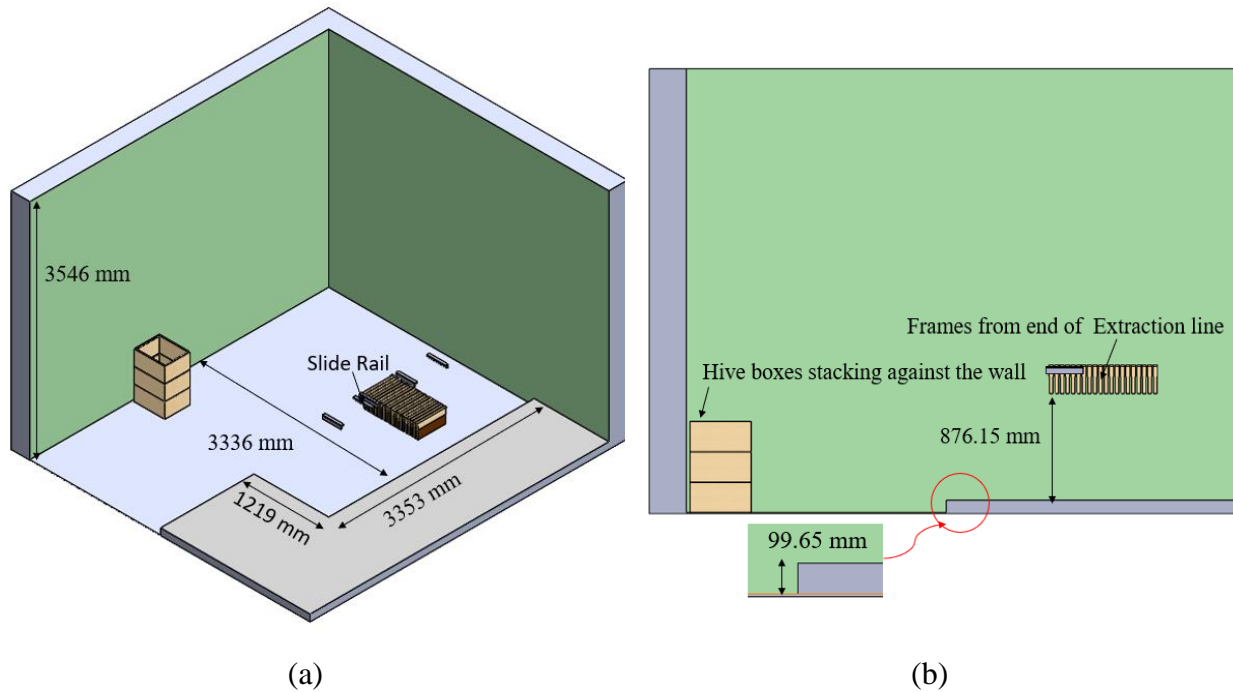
Dimensions of the workspace. (a) Isometric view. (b) Front view.
